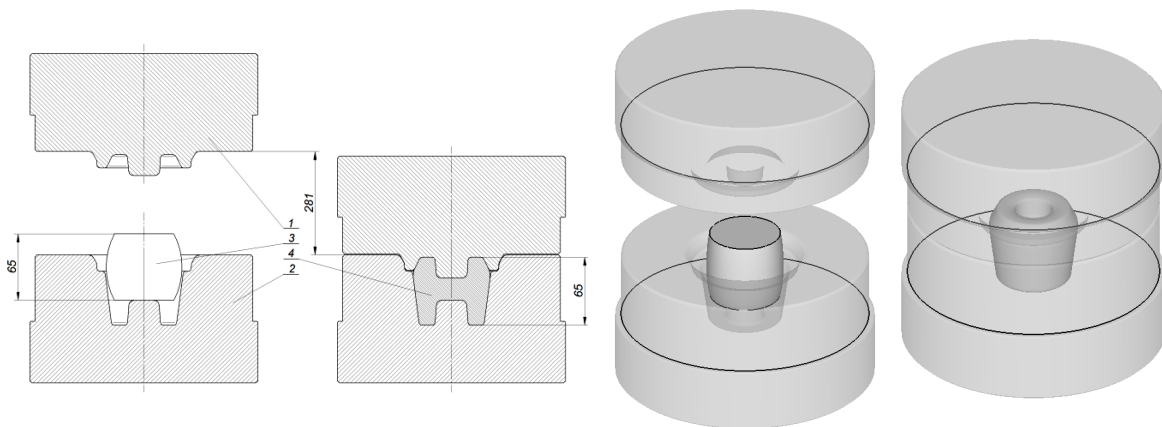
Geometrical model of initial forging of toothed wheel preform (description in the paper)
